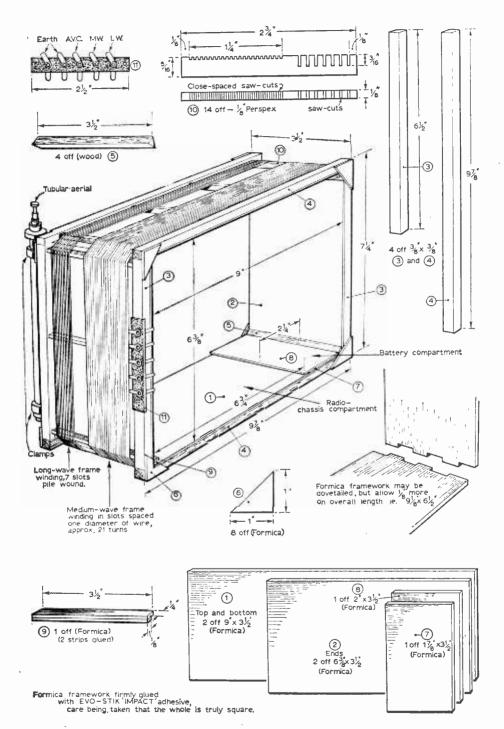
The frame aerial. Component parts and assembly details of the aerial.
